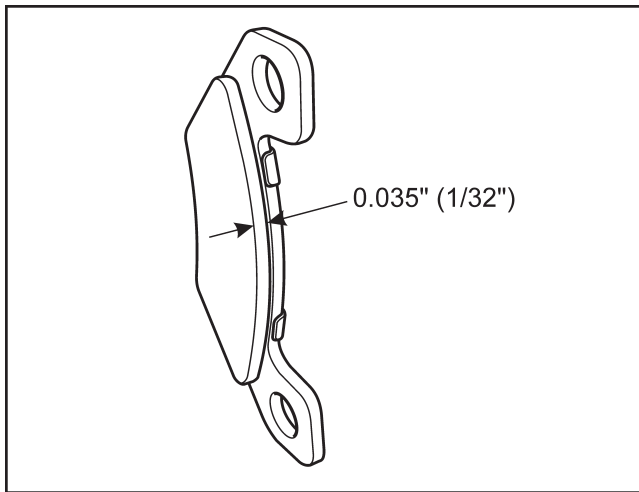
Brake pad wear, hydraulic handbrake pads
